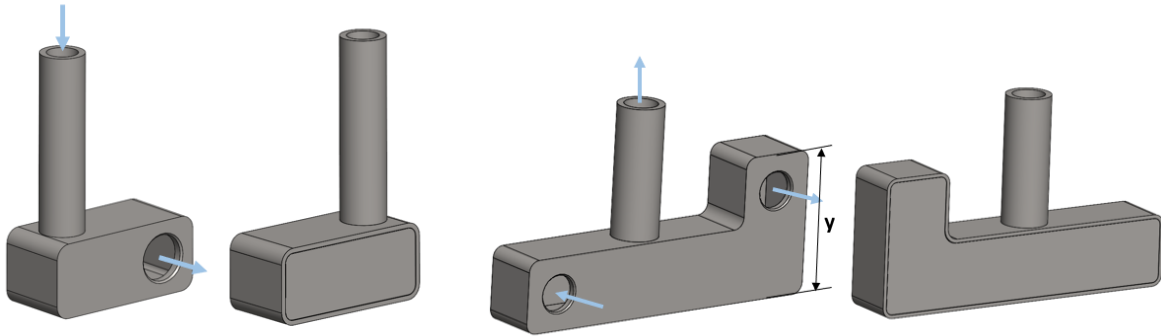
Design of the Inlet- (left) and Outlet (right) Manifold.
